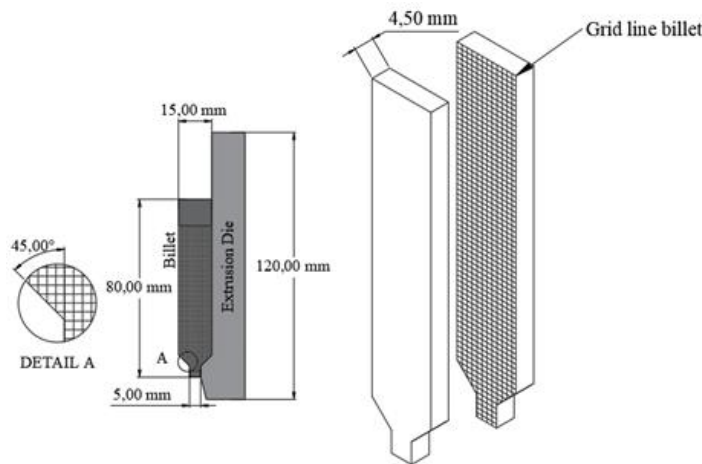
Schematic geometry billet and extrusion die and the stacked billet.
